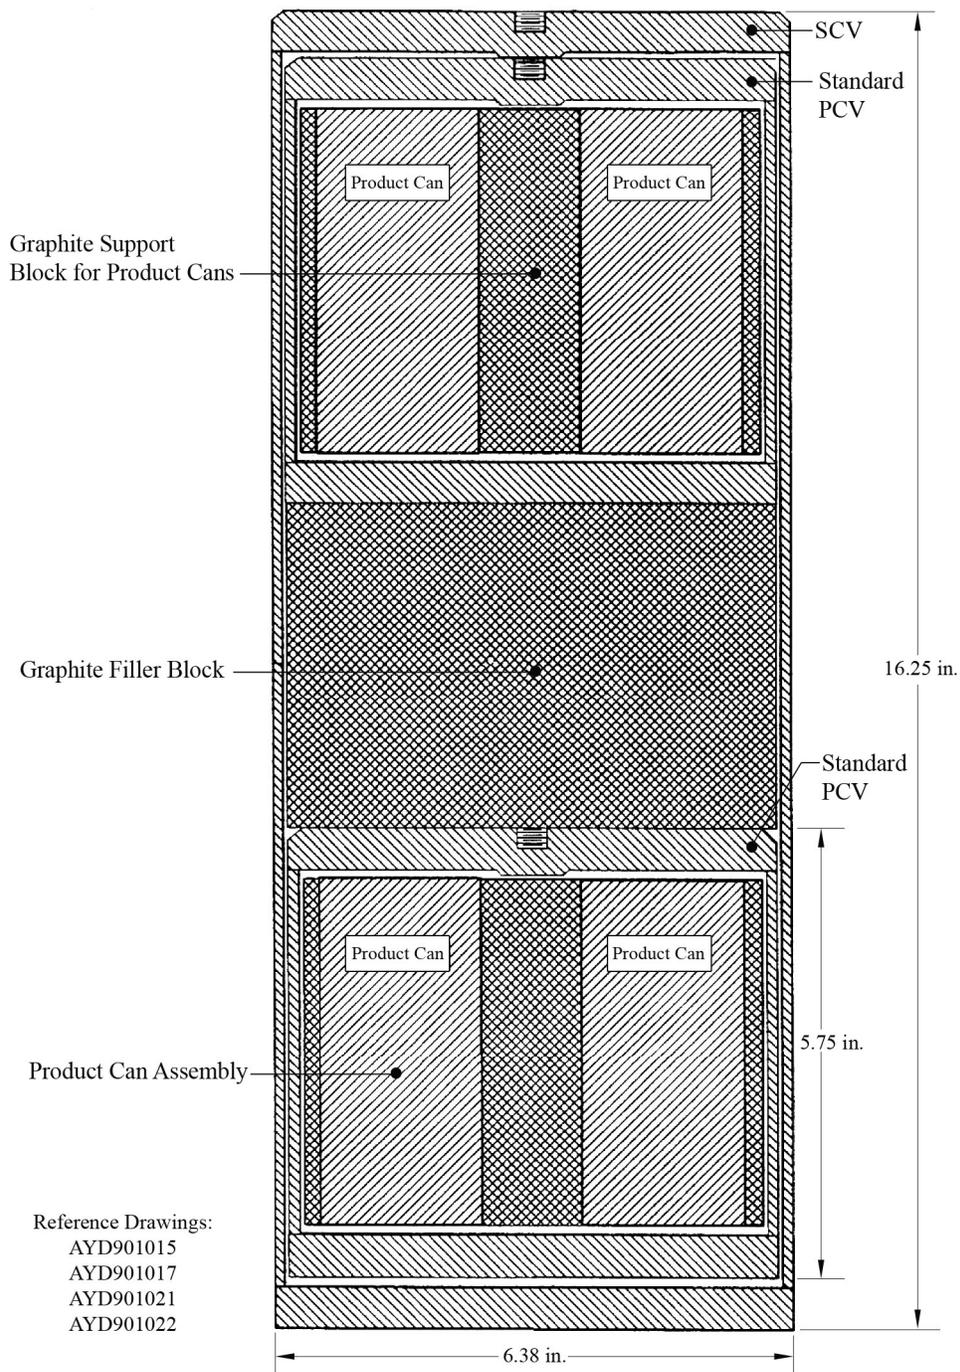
Product Can Containment Assembly [Showing the Standard PCV] (Figure 1.5 in Reference 3 of this TRR).
